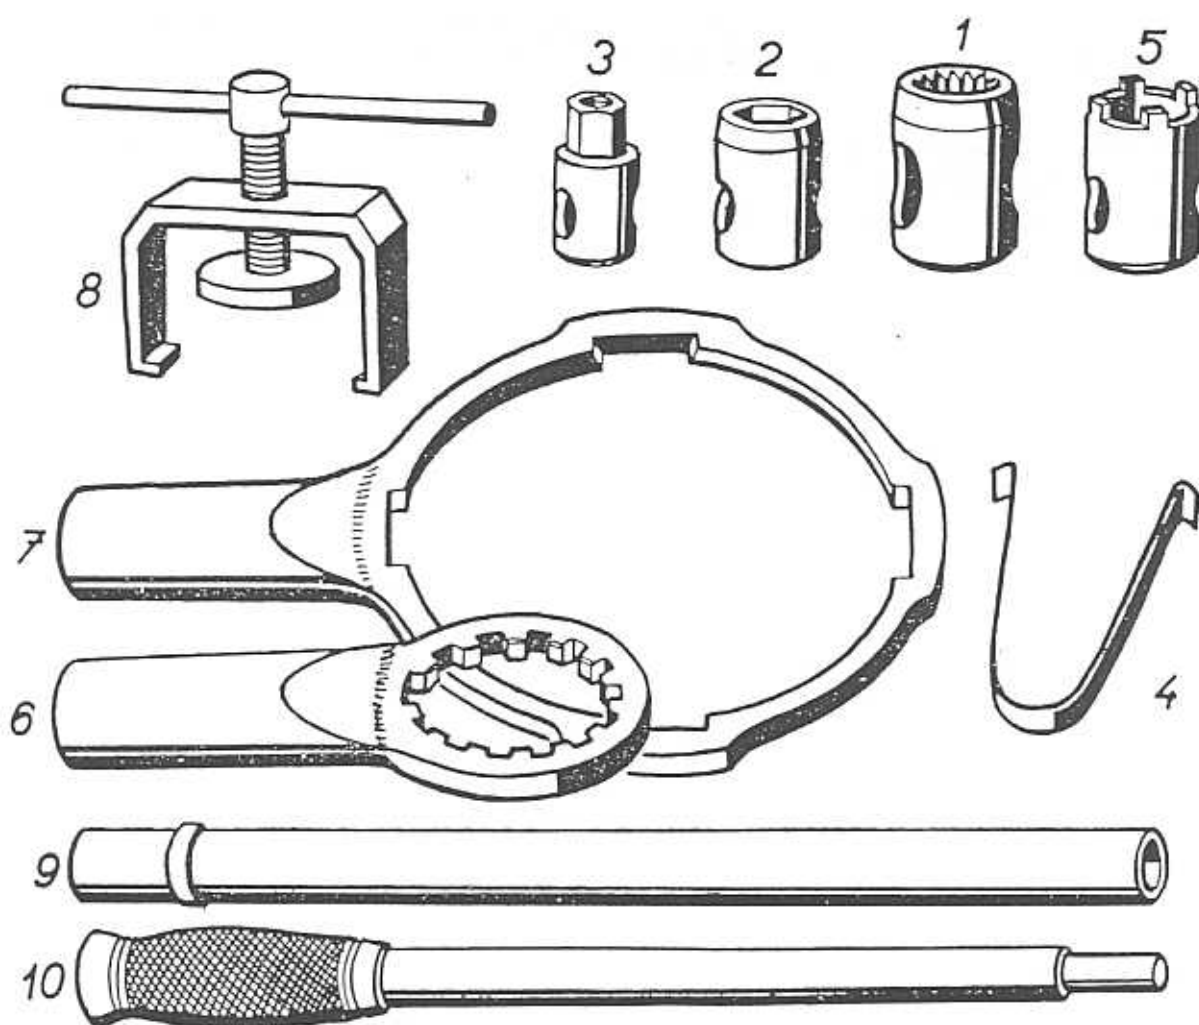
Mounting tools of the V 520 propeller — set "A"
